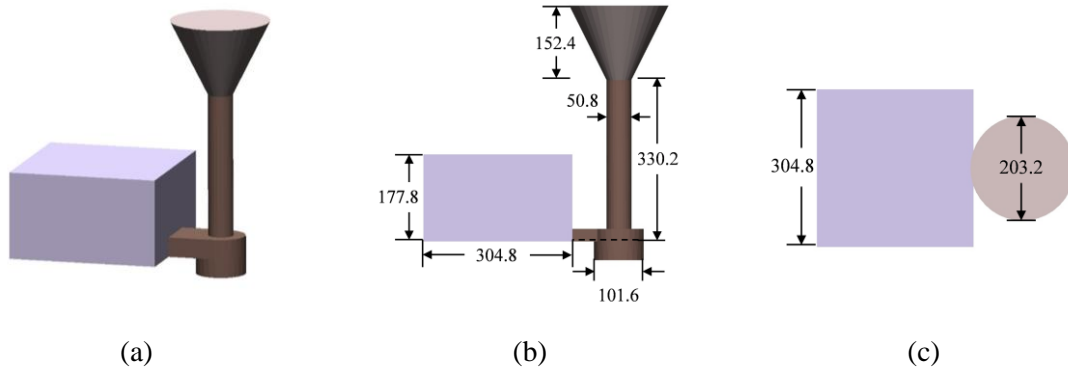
Gating system and casting geometry for the cone pouring cup with bottom ingate cases: (a) isometric view, (b) front view and (c) top view. All dimensions in mm.
